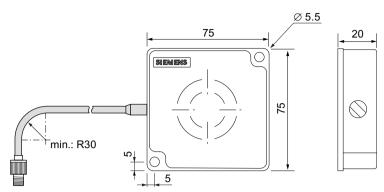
Dimension drawing ANT D1 (all values in mm)
